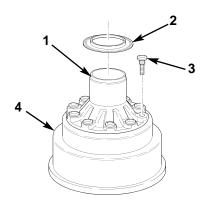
Installing Bearing Cones, Wheel Studs, and Front Tone Ring.
